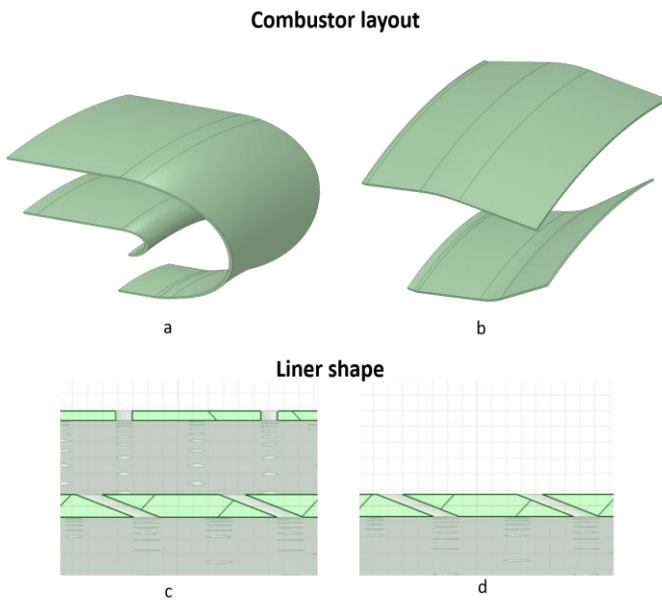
FEASIBLE GEOMETRIES BY THE CAD TOOL
